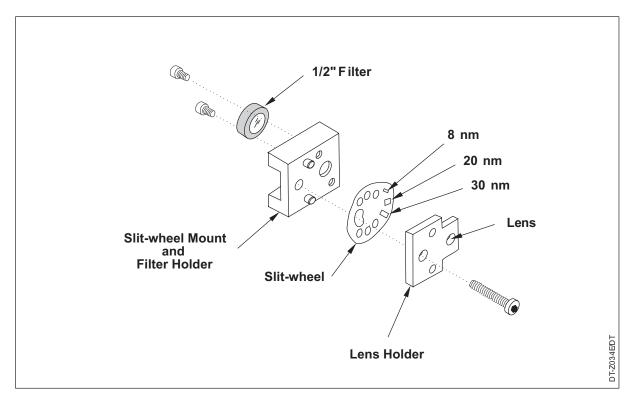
An exploded view of the excitation slit-wheel assembly
